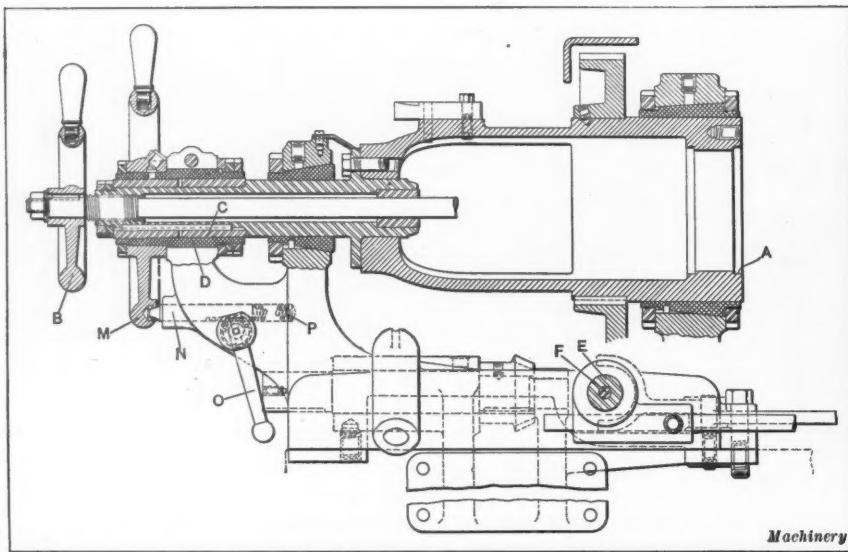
Sectional View of Headstock of Machine shown in Fig. 11
